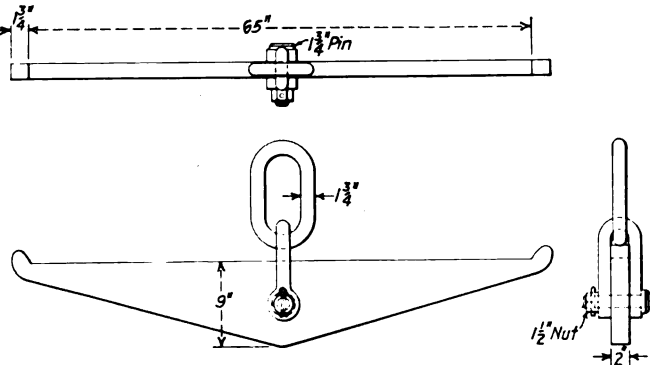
General dimensions of a bar and link connections which may be safely used in lifting locomotive driving wheels
